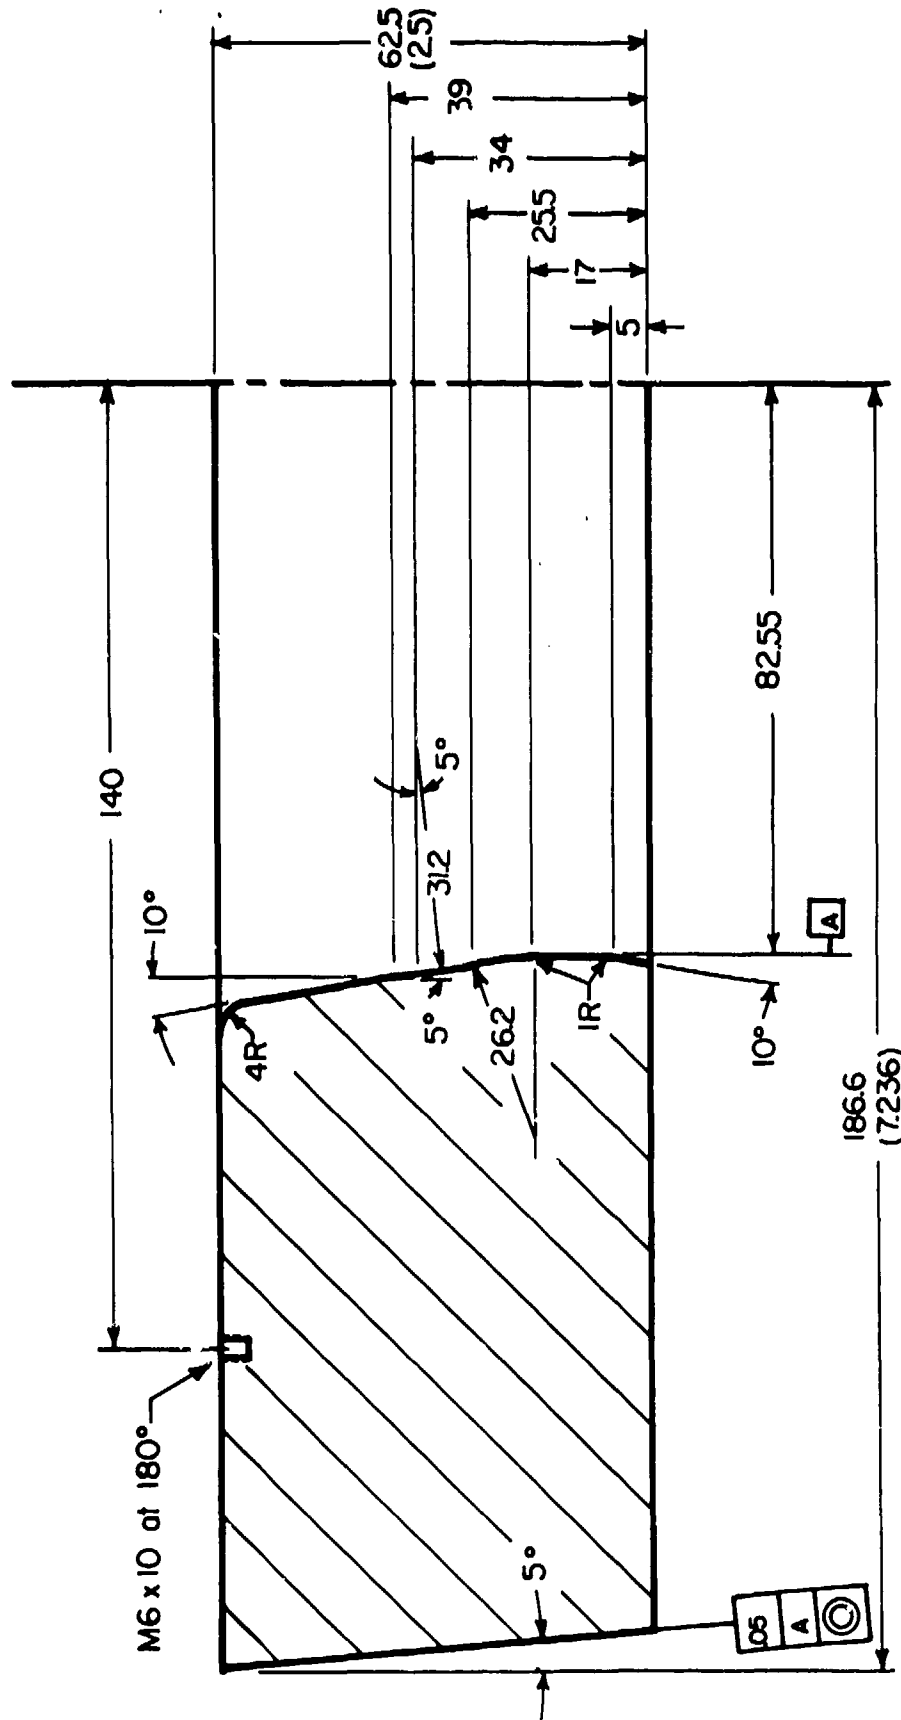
Double curvature die shape for hot drawing of M107 shell (single draw operation).
